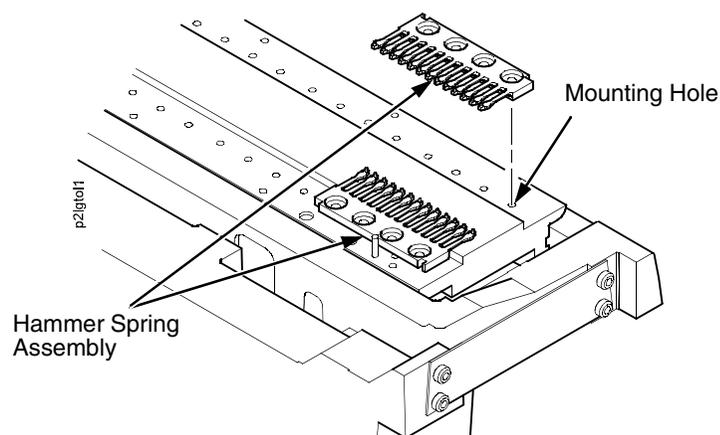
Pairing Hammer Spring Assemblies on the Hammer Bank
